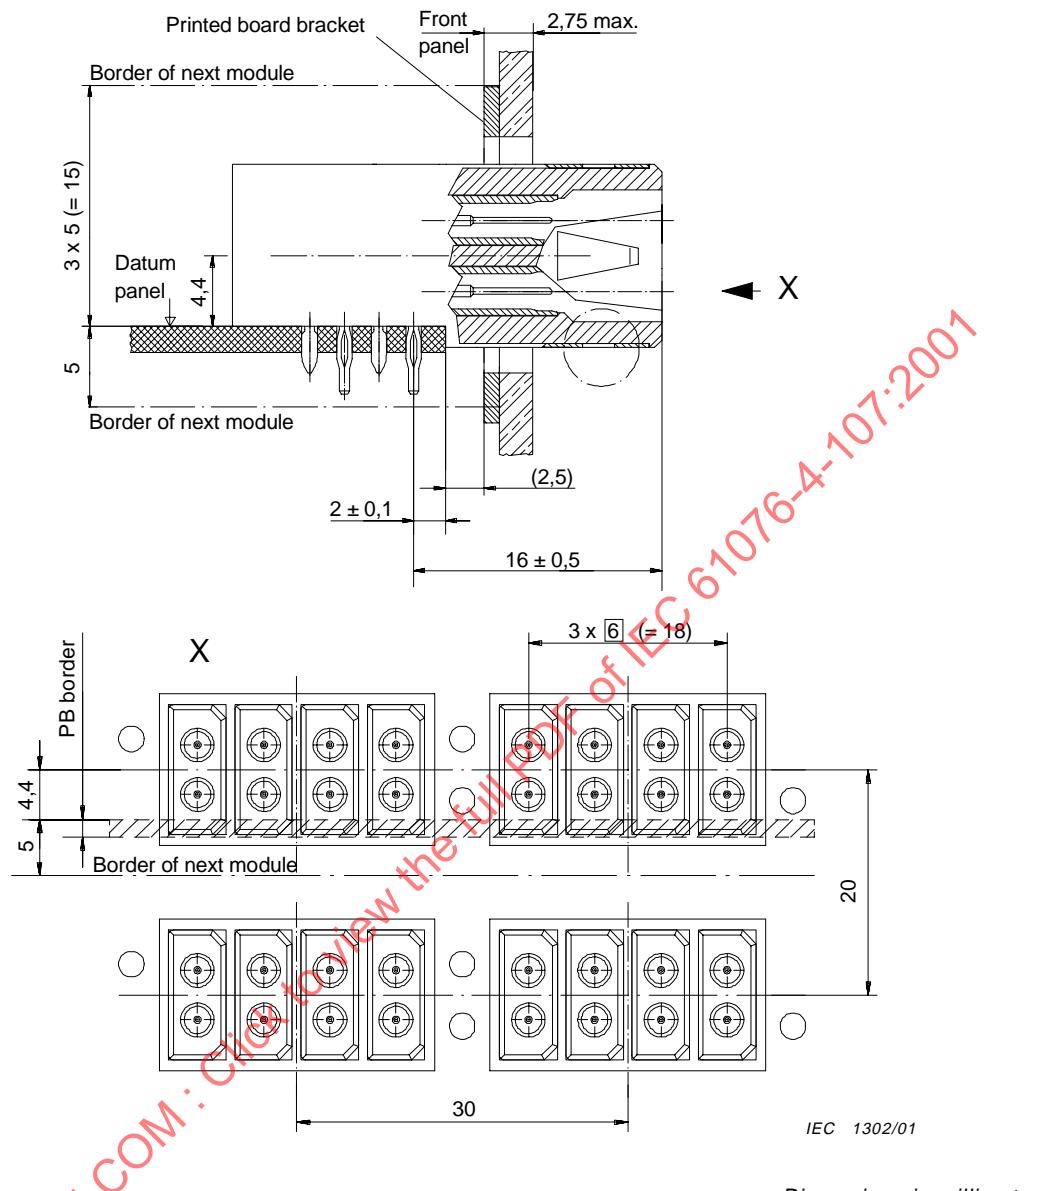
Fixed board connector with coaxial contacts (style B) panel mounted, packaging information
